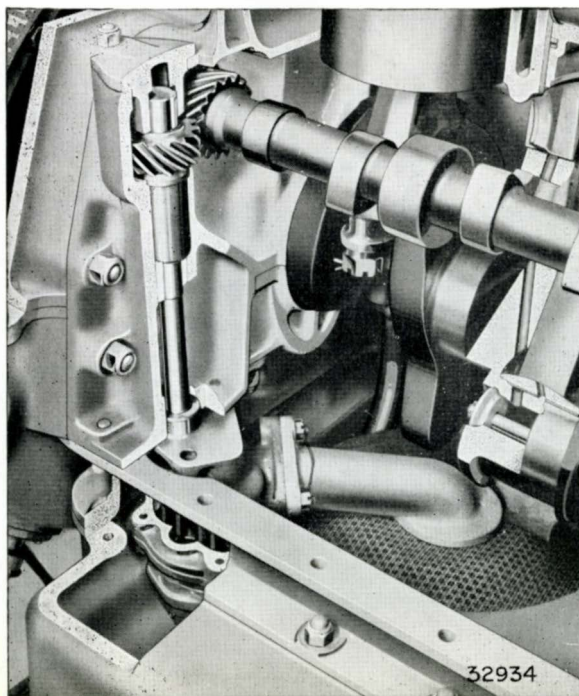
OIL PUMP DRIVE FROM CAMSHAFT
